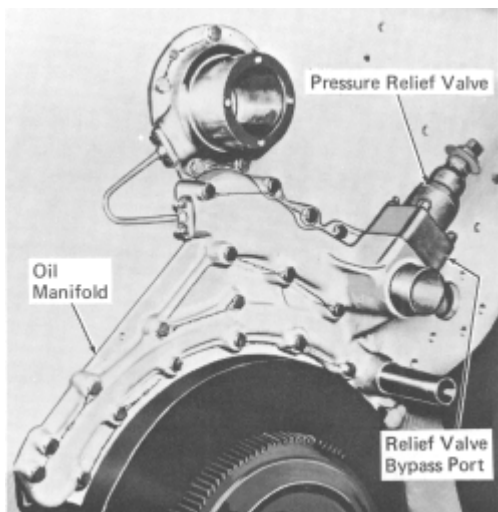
Lube Oil Manifold And Relief Valve
